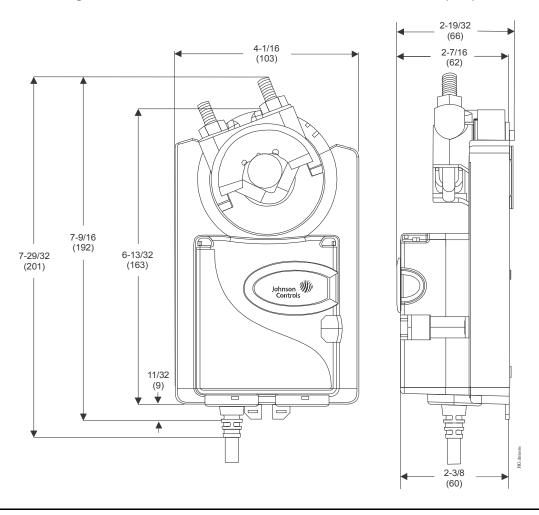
M9320 and M9335 Series Actuator Dimensions, in. (mm)
